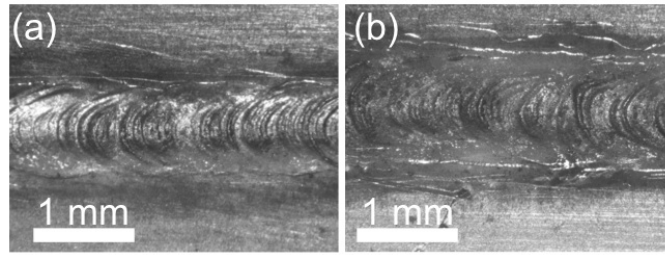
Macrograph of sound welds produced using back shielding gas for (a) AZ61 LBW ($P = 3$ kW, $V = 2200$ mm/min) and (b) WE43 LBW ($P = 3$ kW, $V = 2200$ mm/min).
